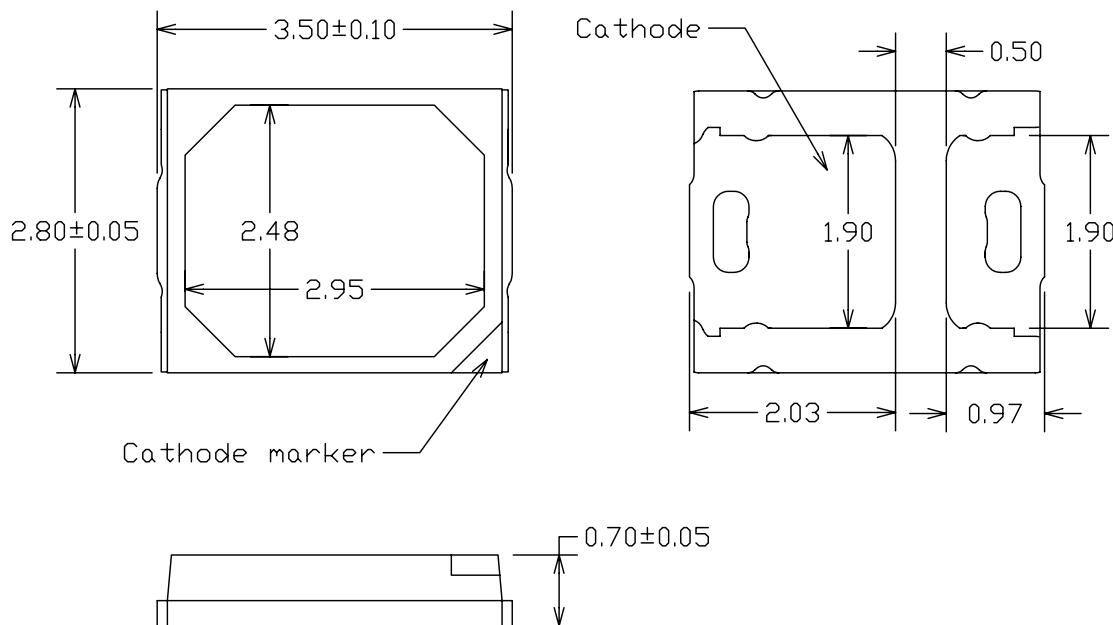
Mechanical dimensions for LUXEON 2835 with FreshFocus Technology.
